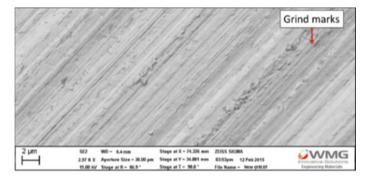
Cutting edge on the tool surface with remarkable grind marks due to tool sharpening
